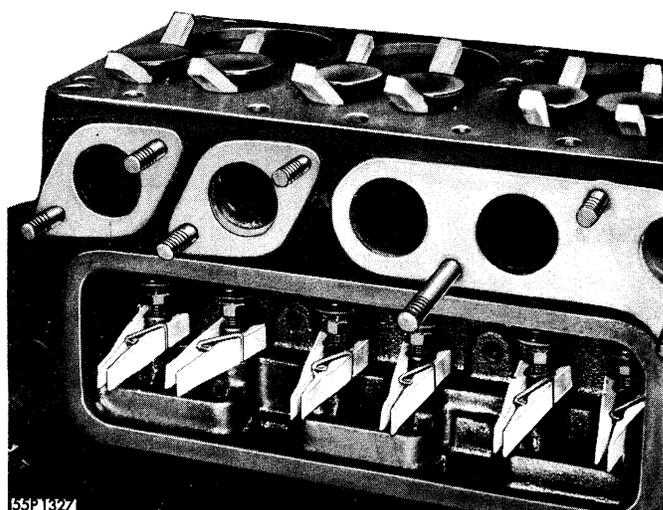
Holding up Valves and Tappets for Camshaft Removal—6 Cylinder Engine
